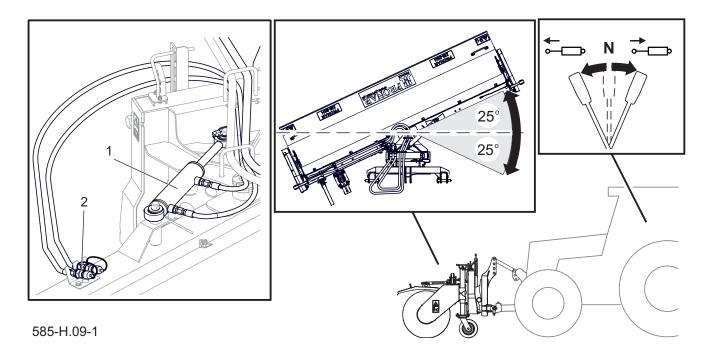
Change the working position (machine with hydraulic steering system - second pair of quick couplers)
